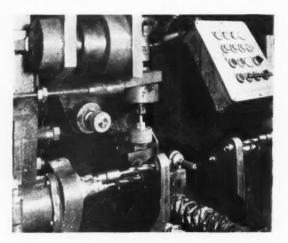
Close-up of three-station, six-operation automatic buffing machine which removes flash from four inside surfaces and reams four bolt holes of motor mount
